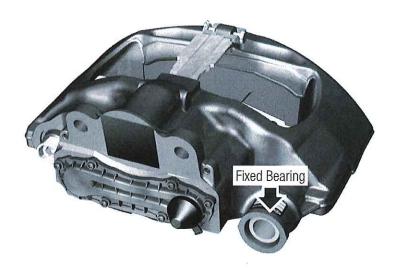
Typical Axial Disc Brake - Fixed Bearing with Cap removed
